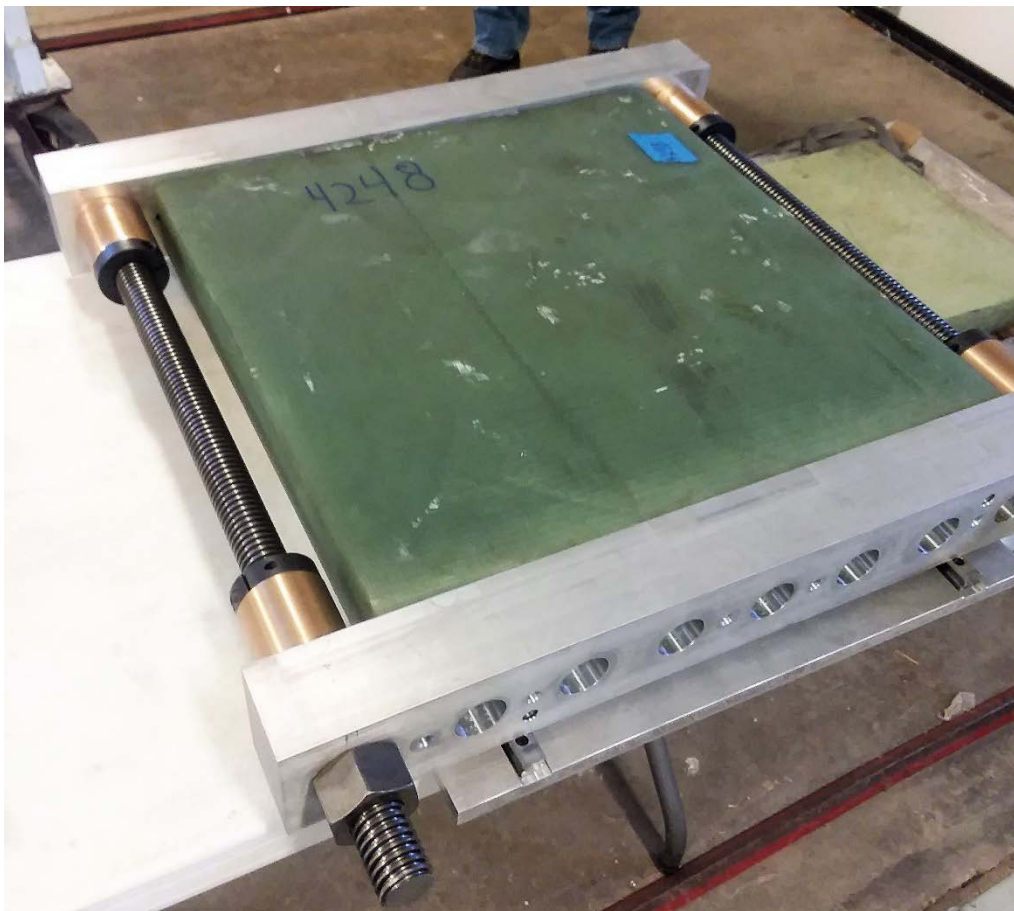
The fixture used to adhesively bond the steel inserts into the thick composite blanks
